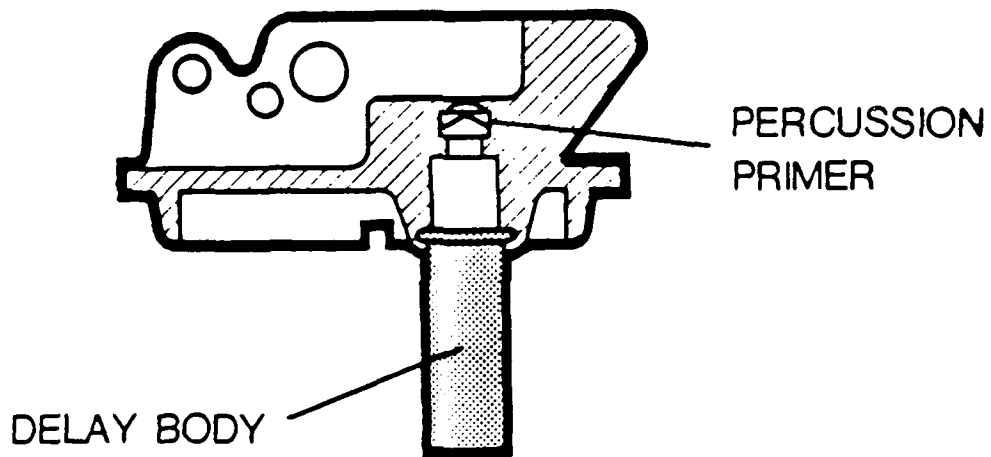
A Delay tube fitted to M49 flare surface trip cover plates.
